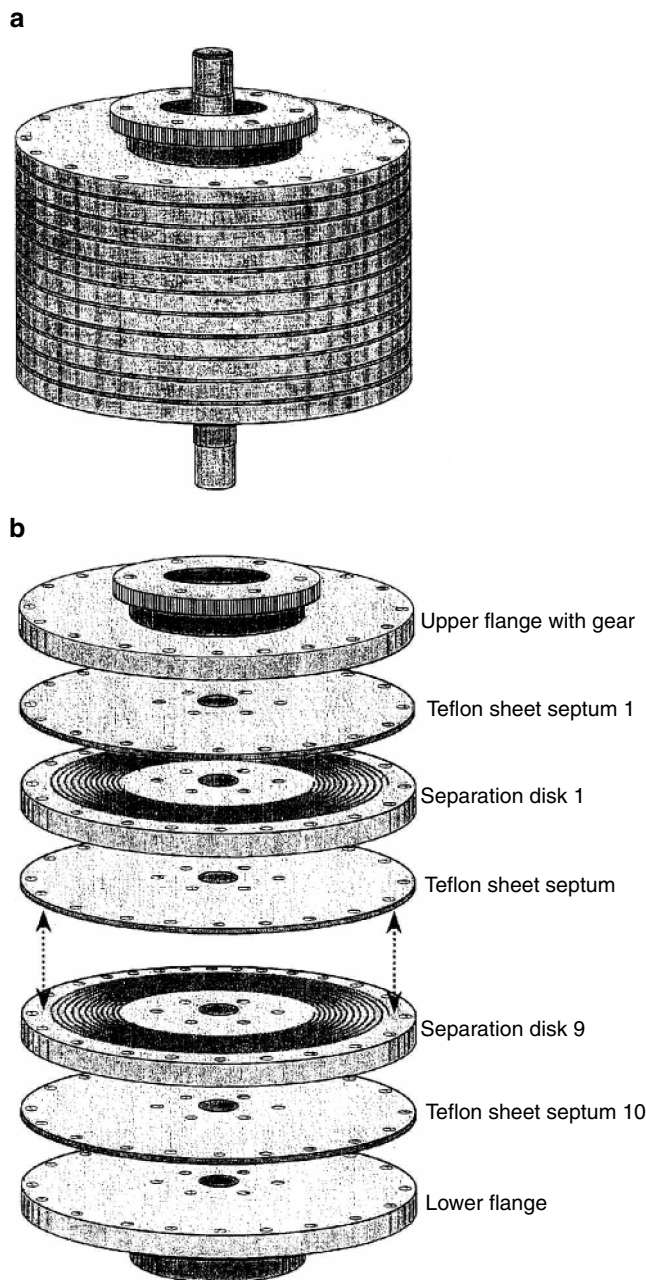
Schematic illustration of the spiral disk assembly. a, Whole view. b, Exploded view showing each component.
